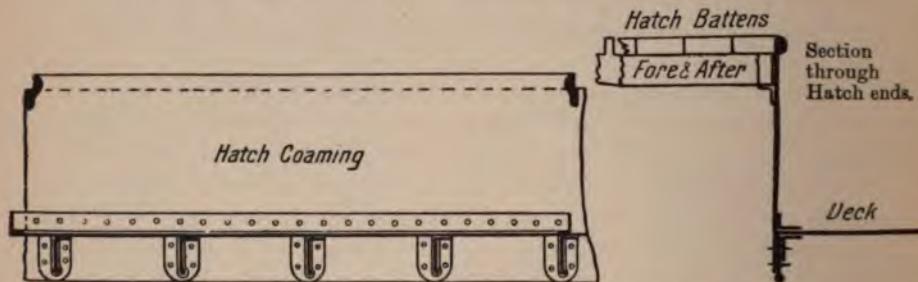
Side Elevation of Hatch Coaming Plate, showing angle connection to deck plating and collars on beam ends.
